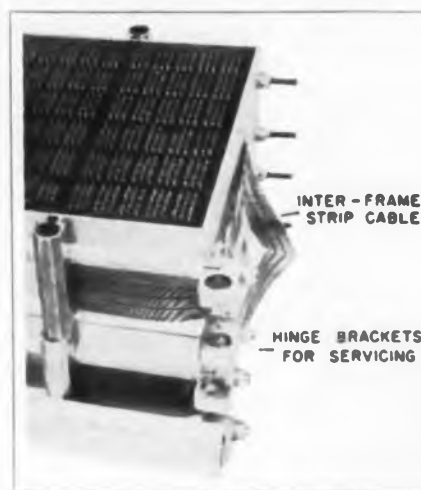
Each frame of the above assembly contains 120 circuit modules plus one wiring module. Tape cable is used to interconnect the two wiring modules.
